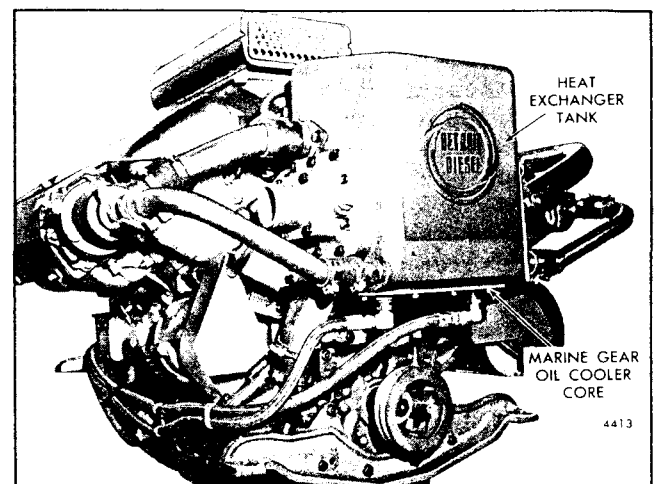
Typical Marine Gear Oil Cooler Core Mounting
